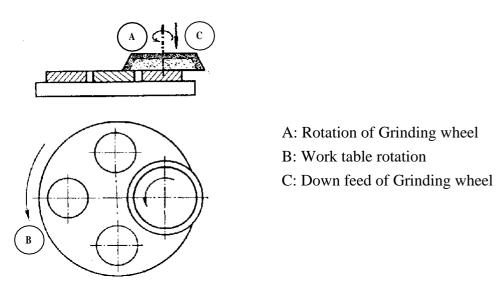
Surface Grinding in vertical spindle rotary table surface grinder
